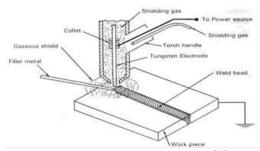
A-TIG Welding process<sup>[16]</sup>
